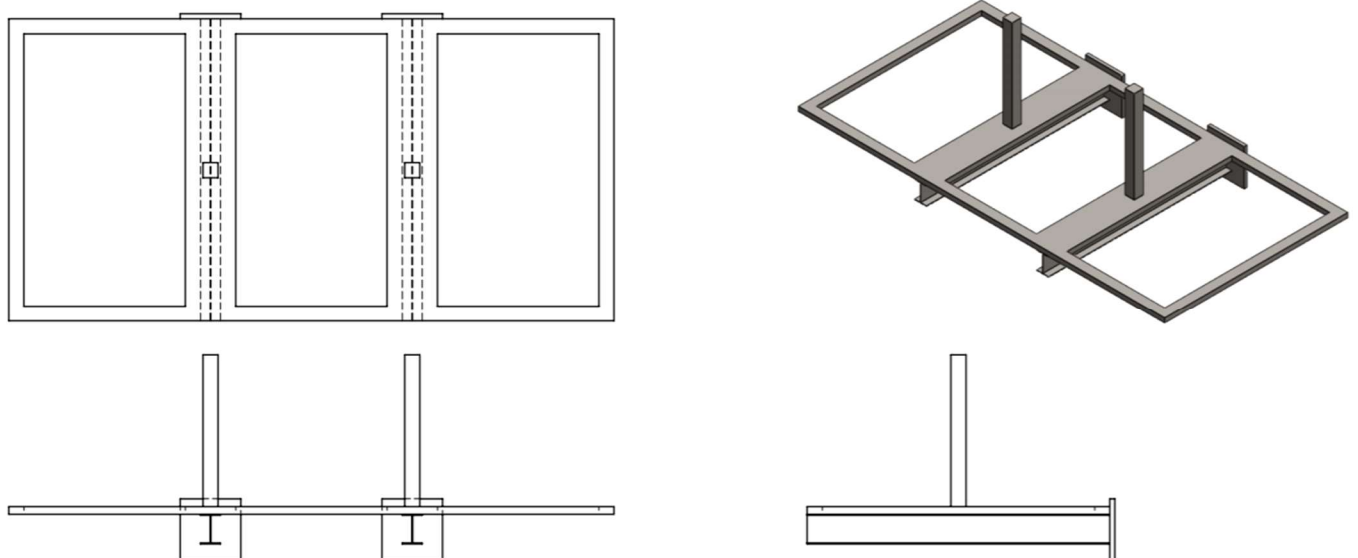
Final Assembly Drawing (All dimensions are included in the components drawing)
